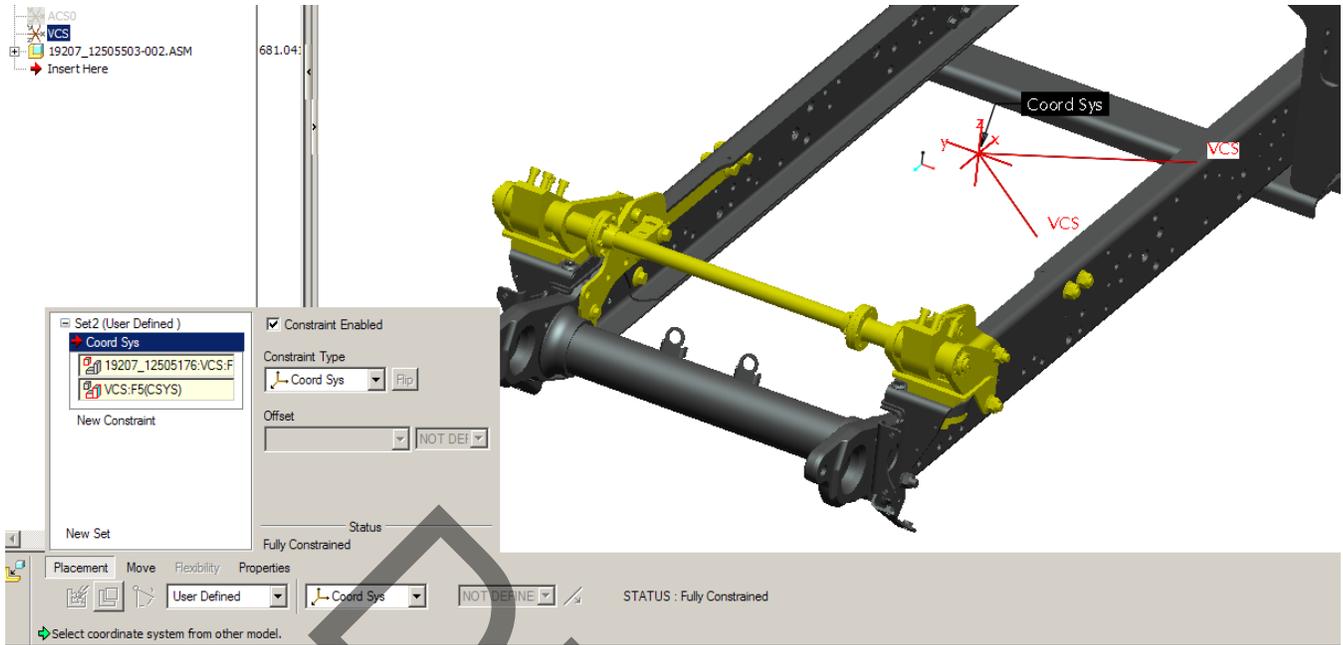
FRONT CAB MOUNT ASSEMBLY CONSTRAINT
